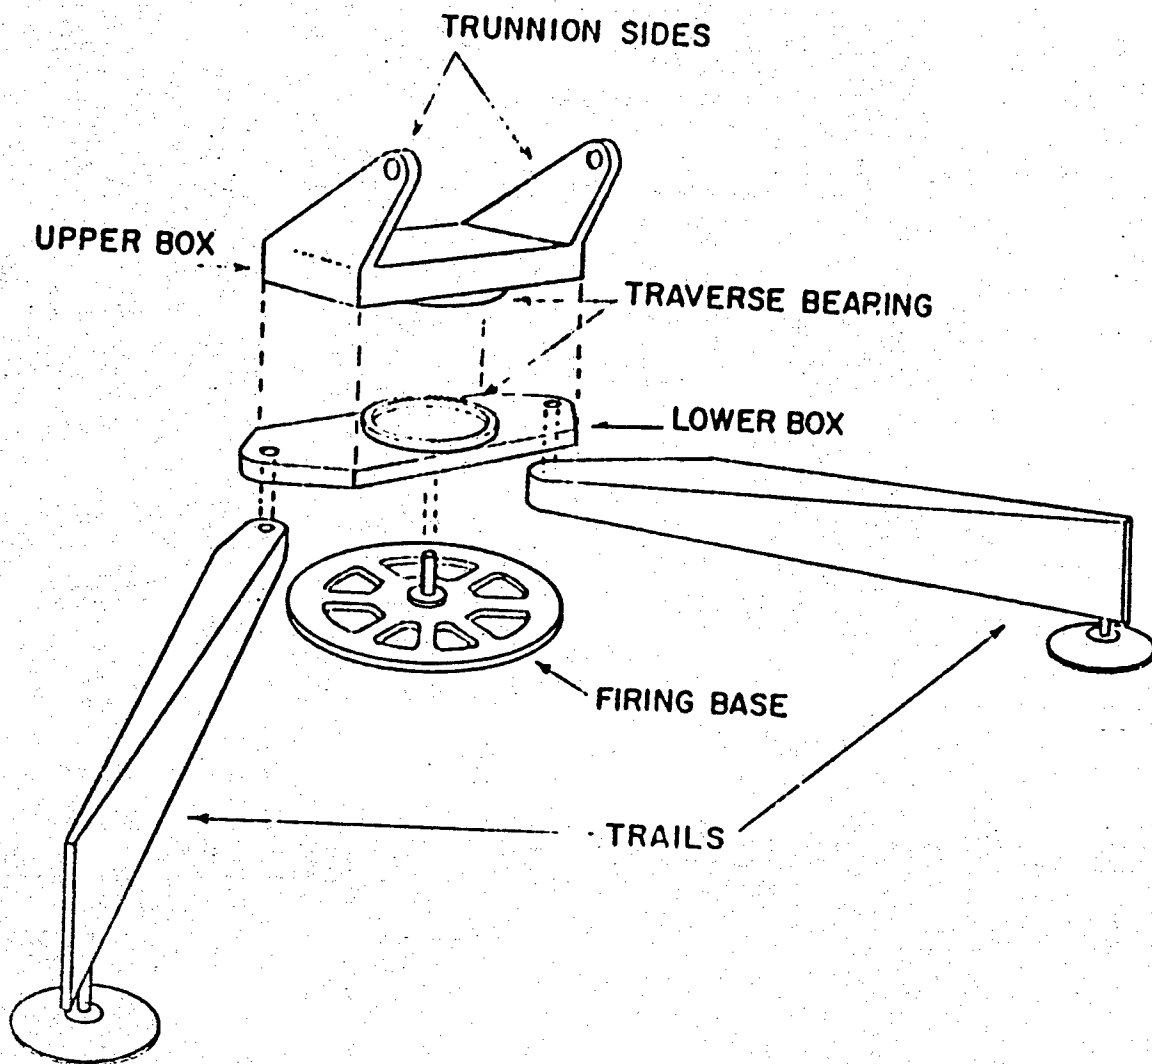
EXPLODED VIEW OF THE SUPPORTING STRUCTURE
